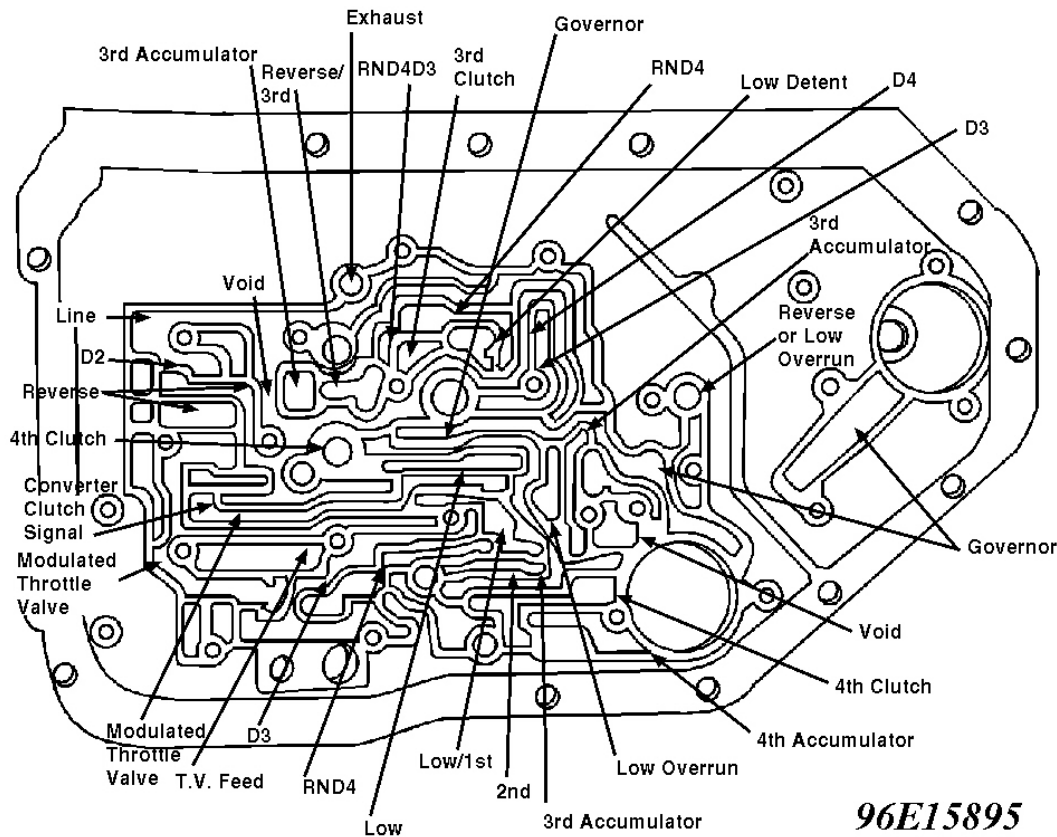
Bottom View of Transmission Case Showing Oil Passages
